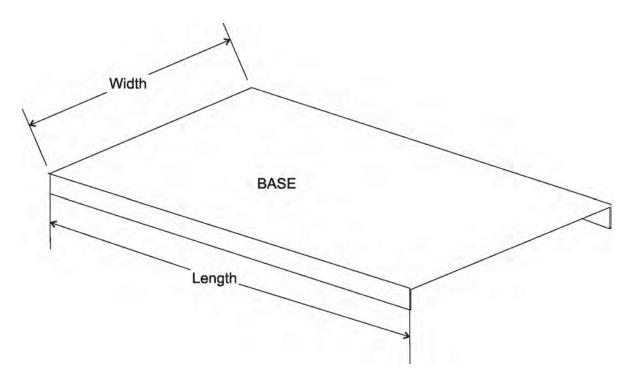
Base Channel Dimensions for Pedestal Mounted Centrifugal Pumps
